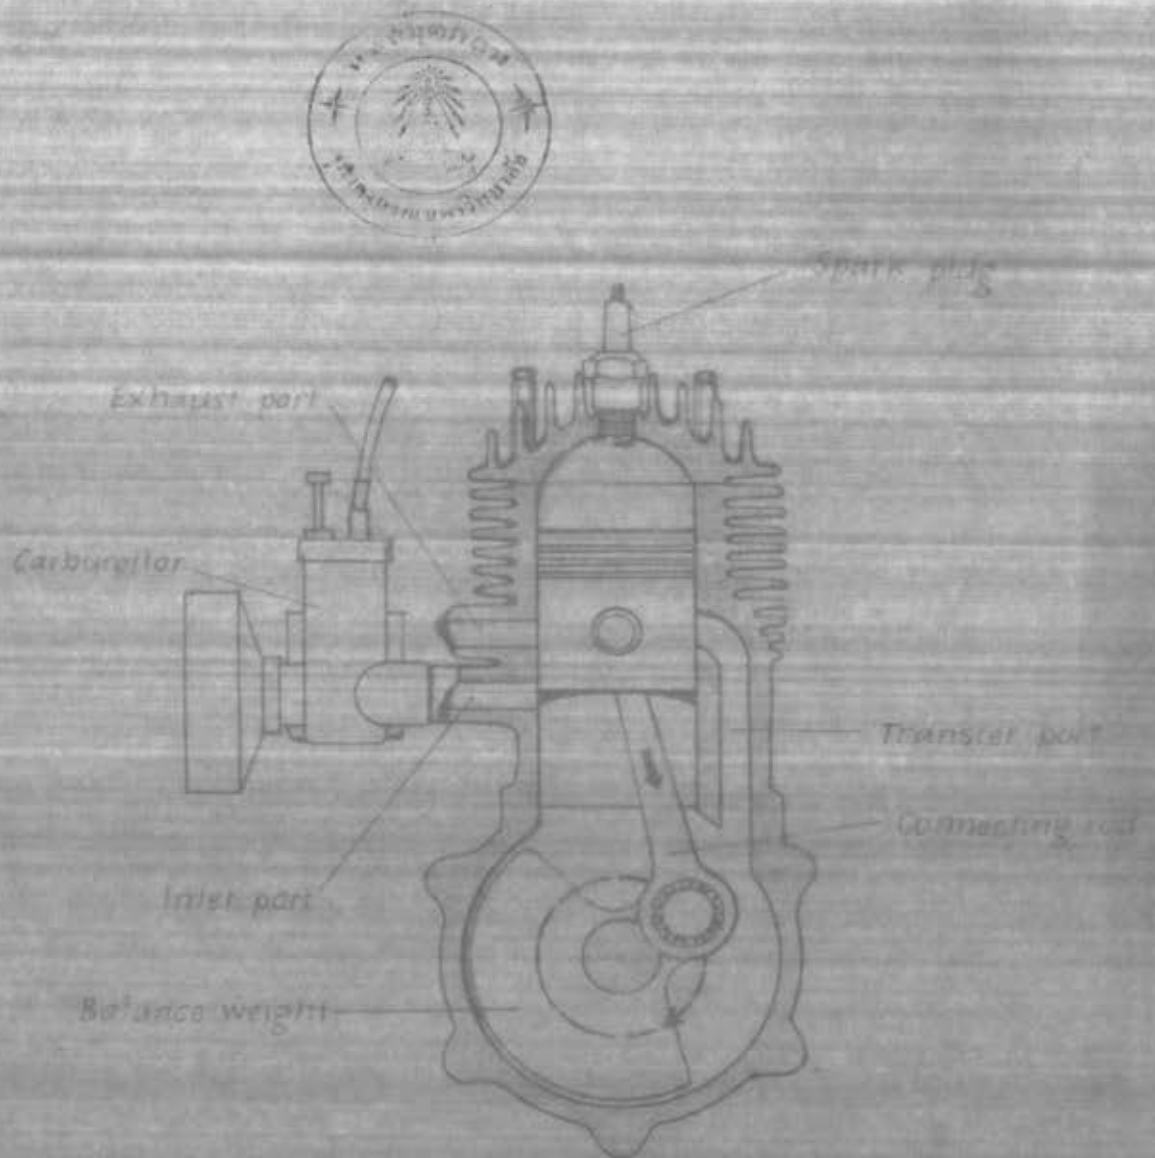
Typical 2 stroke Crankcase-Scavenge Engine
